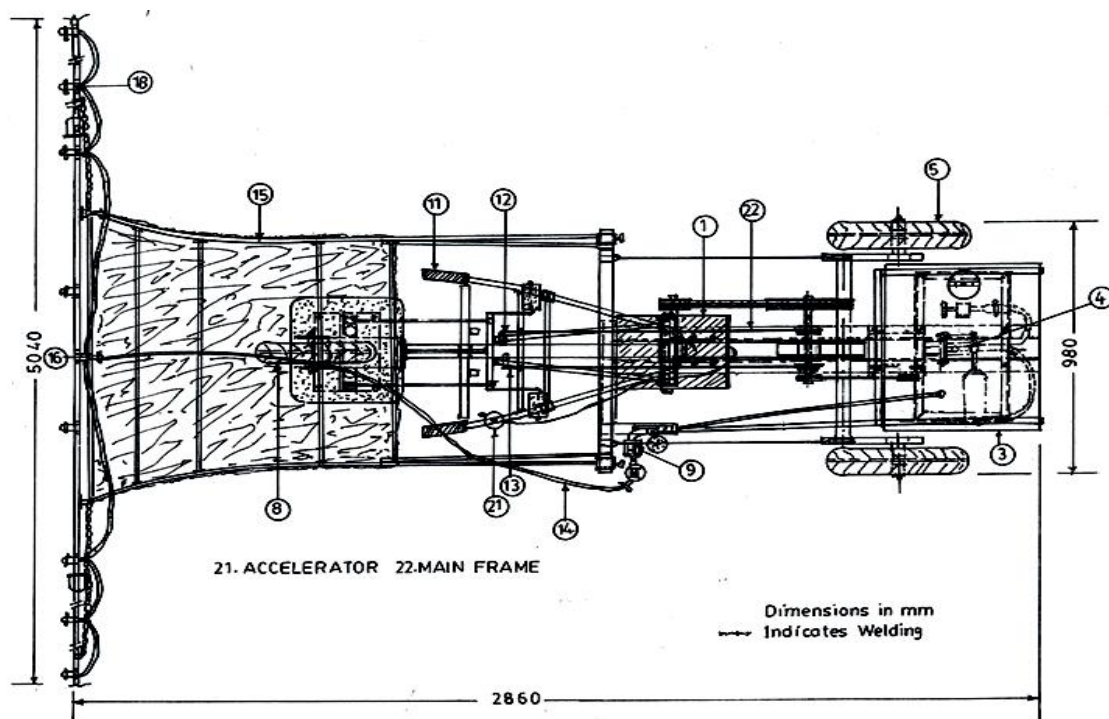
Top view of riding type self propelled boom sprayer.
